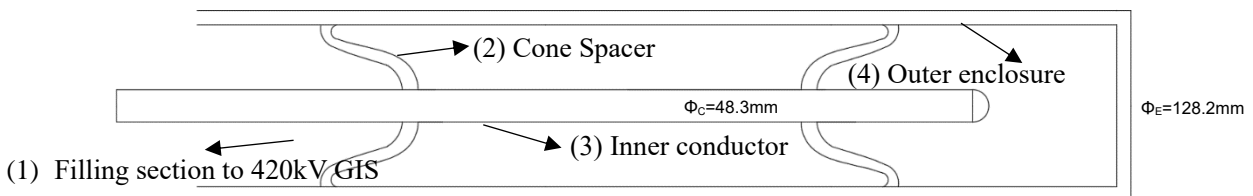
Initial GIL geometrical structure drawn in AutoCAD (1) Filling section to 400kV GIS, (2) Cone Spacer, (3) Inner conductor, (4) Outer enclosure, the diameter of the conductor is 48.3mm, the diameter of the enclosure is 128.2mm, the thickness of the spacer is around 8mm, the length of the spacer is around 71mm.
